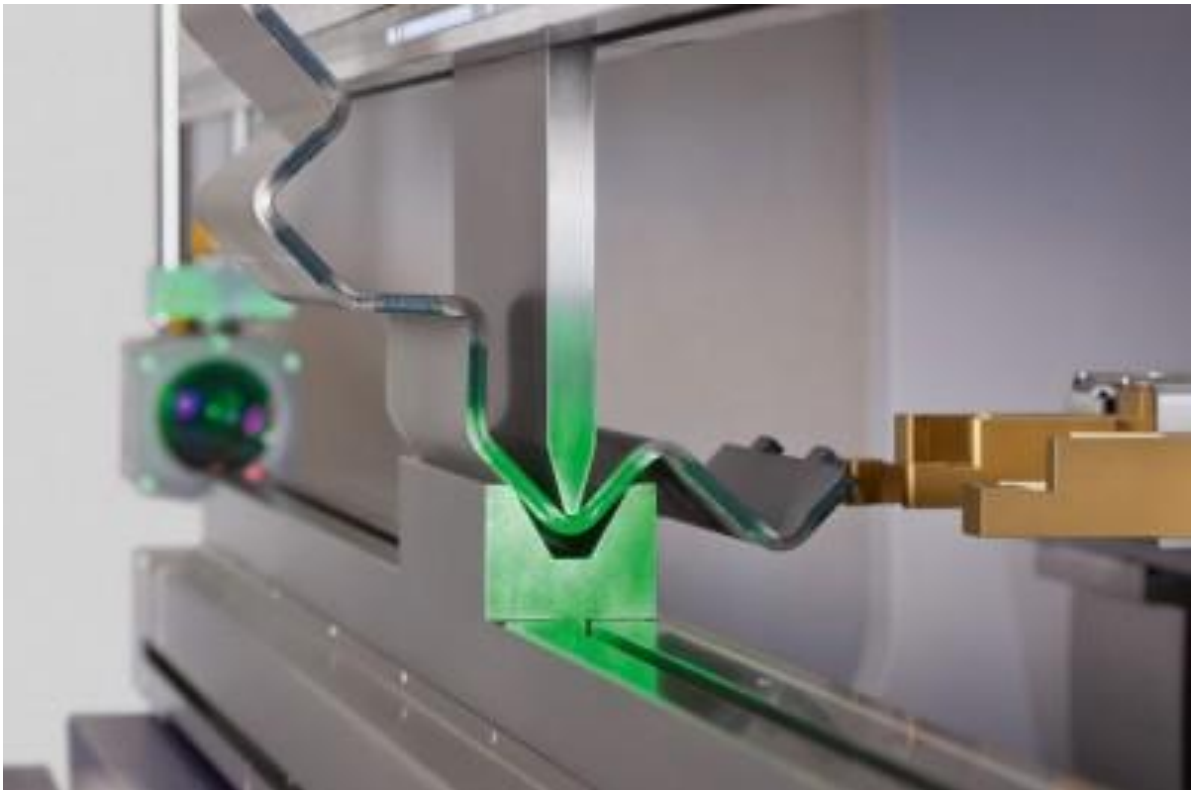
Forming methods for cold-formed steel members - Press braking [1]
